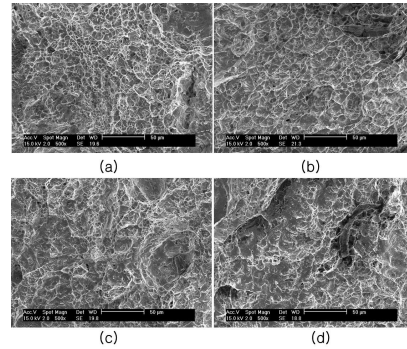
Fracture surface morphology for Inconel 82/182 welds
